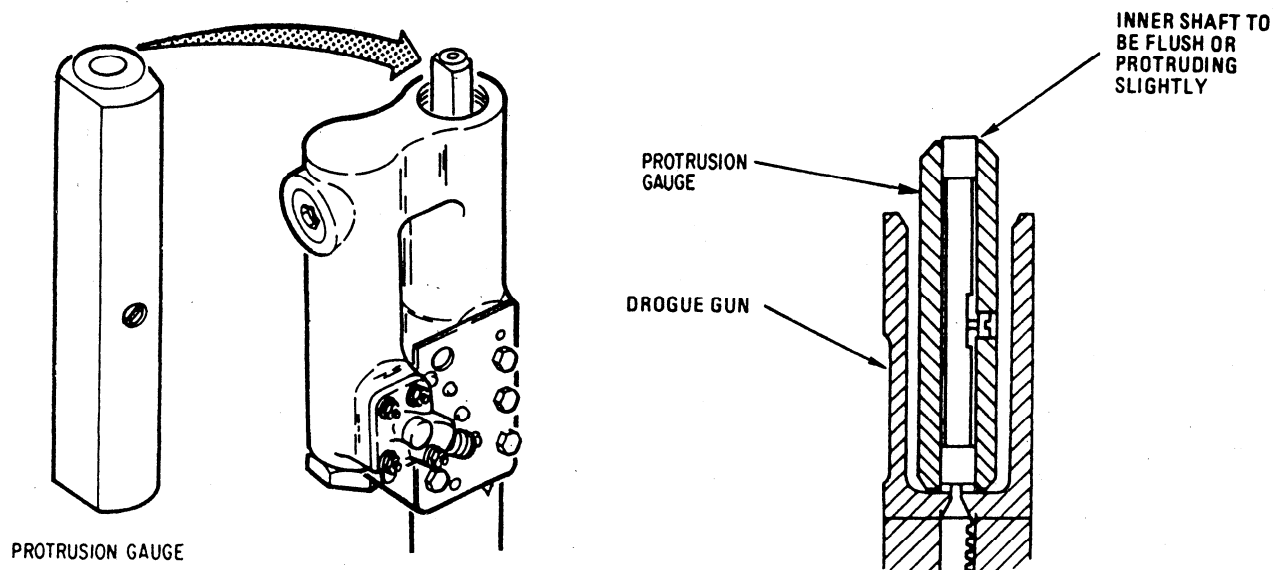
Drogue gun firing pin protrusion check-out.
